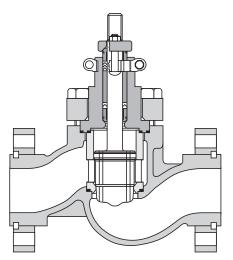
Globe-body subassembly with pressure-balanced trim. (*Courtesy of Valtek International*)
